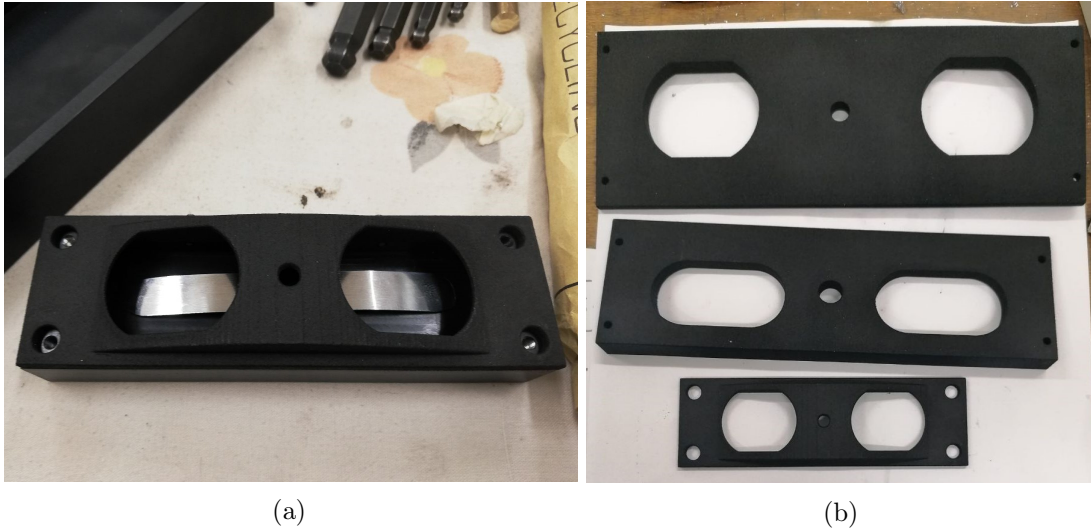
a: M2 cradle, with its mask fastened. It is possible to see the springs inside. b: Masks for the three mirrors
